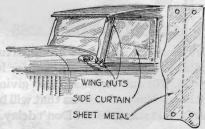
Shields of sheet aluminum bolted to the windshield help keep the car warm
